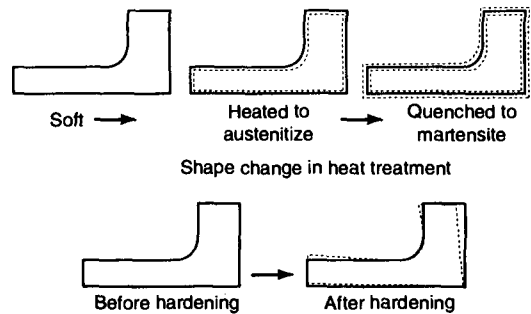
Schematic examples of size and shape changes caused by heat treatment. Courtesy of Latrobe Steel Co.
